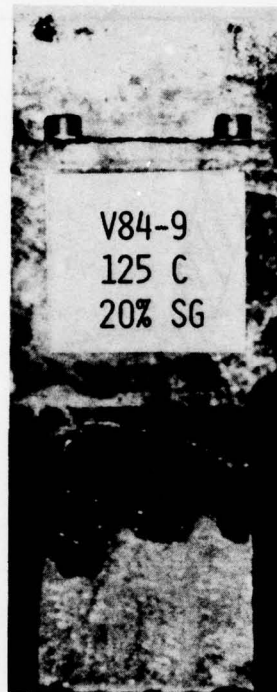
Fracture surface of an irradiated weld deposit (IAR condition) showing the irregular crack front extension. This behavior is attributed to material inhomogeneity associated with the three weld passes which are clearly defined.
